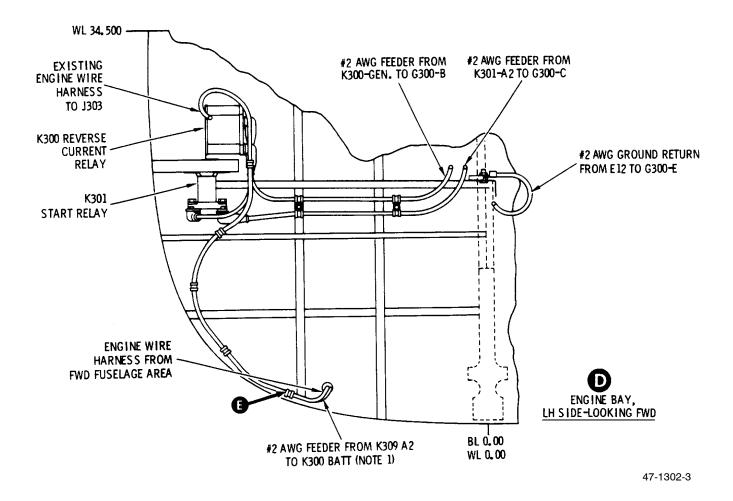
Component Locations and Wire Routing Installation (Sheet 3 of 5)
